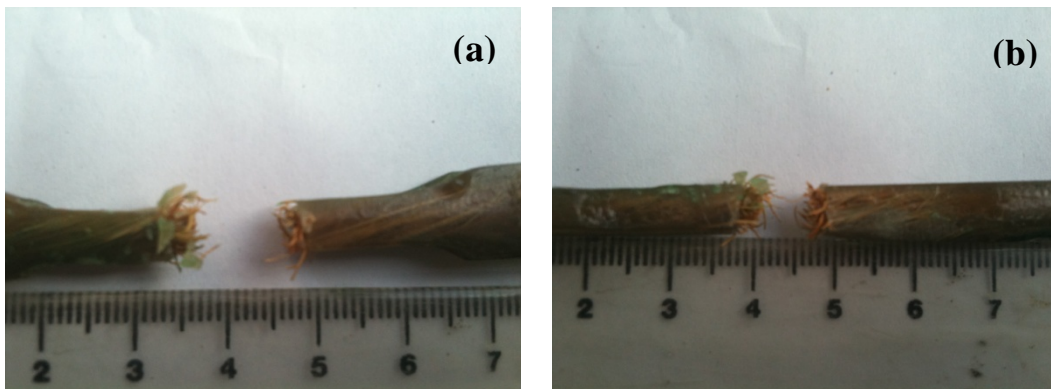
Fracture tip of a 40% coir fiber polyester composites specimen (a) front view and (b) side view.
